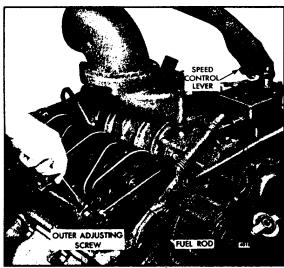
Positioning No. 3L Injector Rack Control Lever
